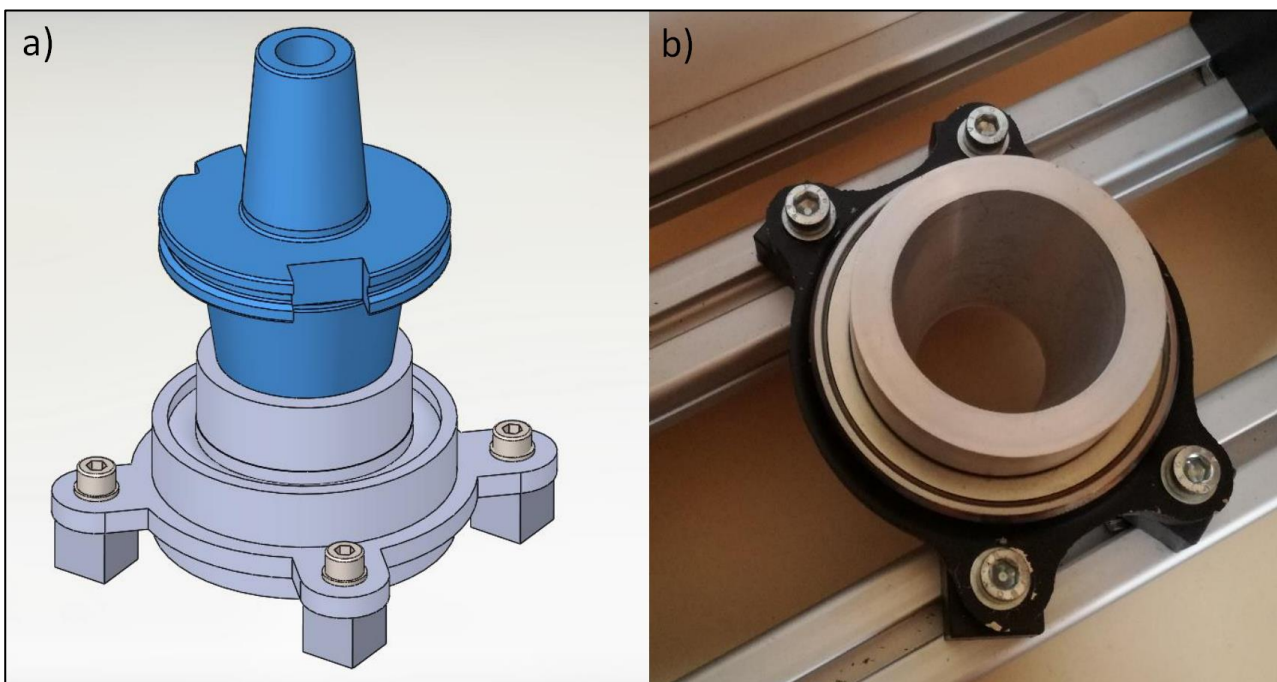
a) 3D model of tool holder, b) Actual implementation of tool holder
